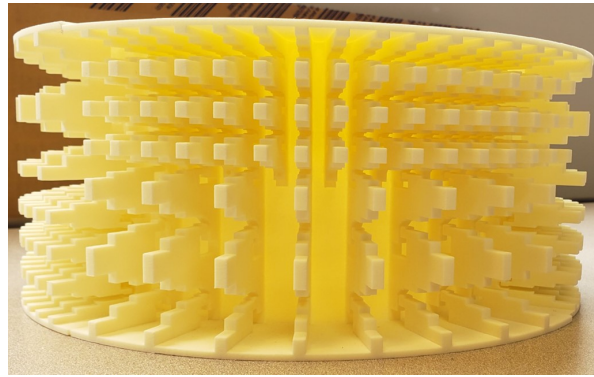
AM fabrication of WSCA Design 1 from Section 4. Printed using a selective laser sintering (SLS) printer.
